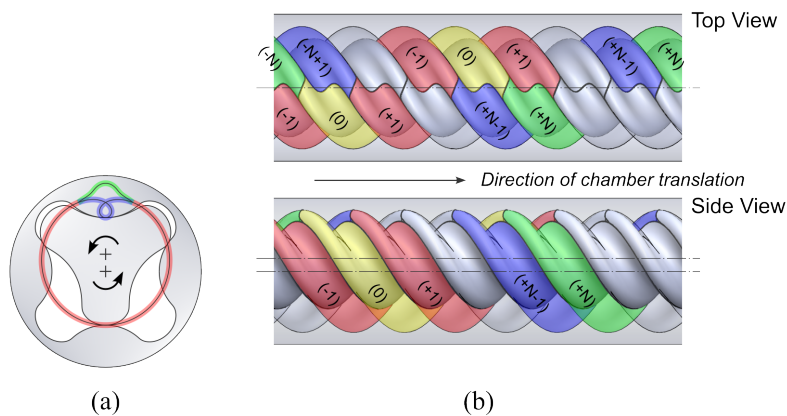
Illustration of leakage paths in an internally geared screw machine (third-angle projection). (a) rotor rotation and chamber positions; (b) top and side views of chamber indexing along the axial direction. Leakage may occur between adjacent chambers as they translate during operation.
